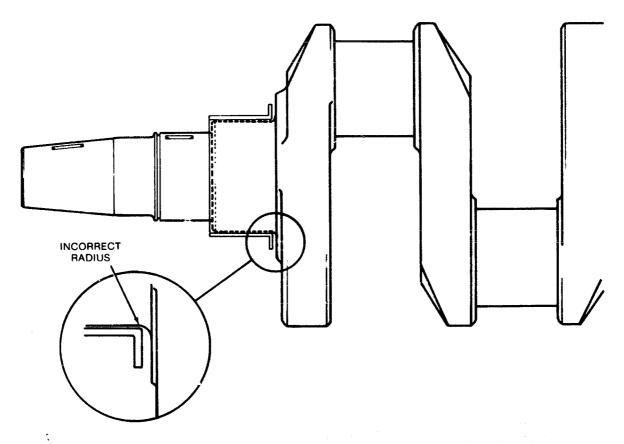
FRONT MAIN BEARING AND CRANKSHAFT RADIUS DO NOT MATCH RESULTING IN A PRE-LOAD CONDITION AND NO ENDPLAY
